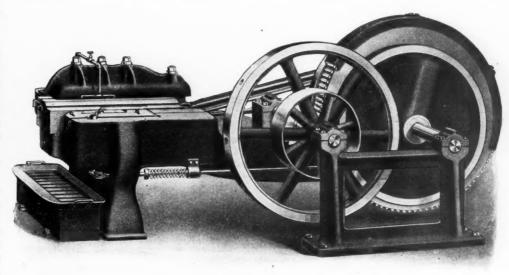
Cutting-off Attachment mounted on Large Size Buckeye Die-stock.
